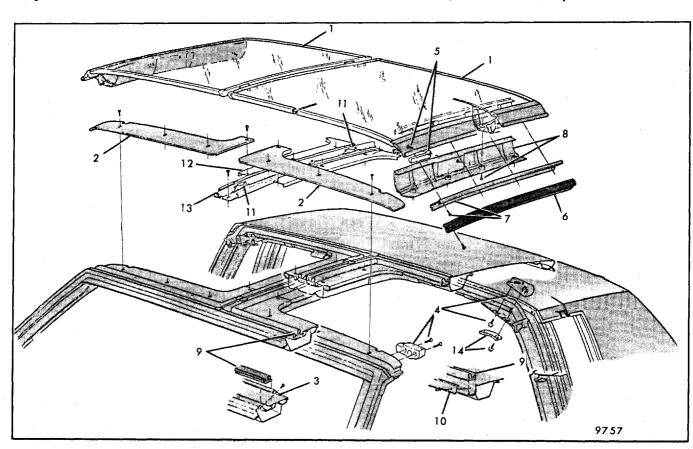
A Hatch Roof - Lift-off Panel Assembly (Exploded)
